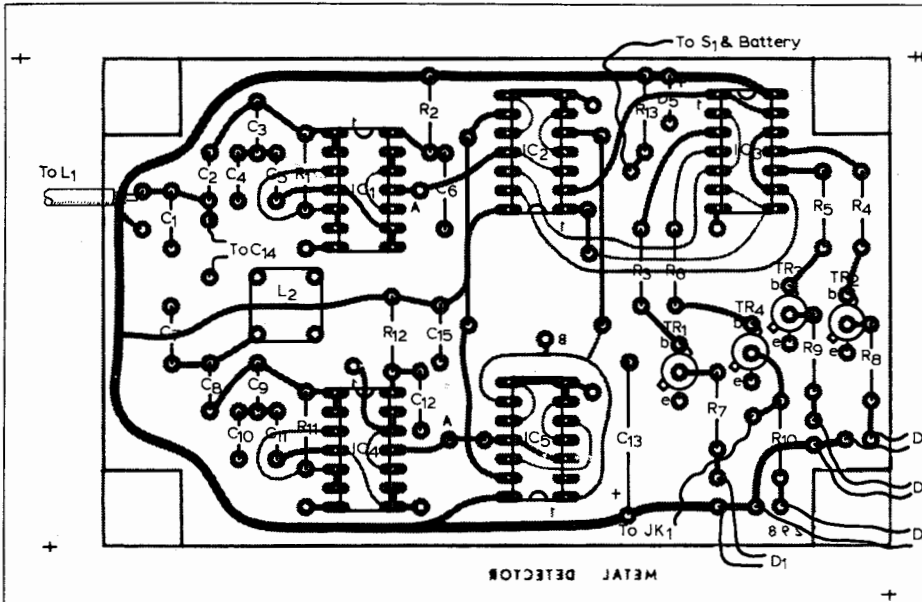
Printed circuit board layout and component overlay. A double sided board is used with the top copper layer forming a ground plane. All component leads connected to single pads are soldered to the top of the board. All other component connections are made on the underside of the board. The ground plane should be cleared with a small drill where necessary. Some additional pads have been provided on the layout to assist with the modification shown in Fig. 10.
